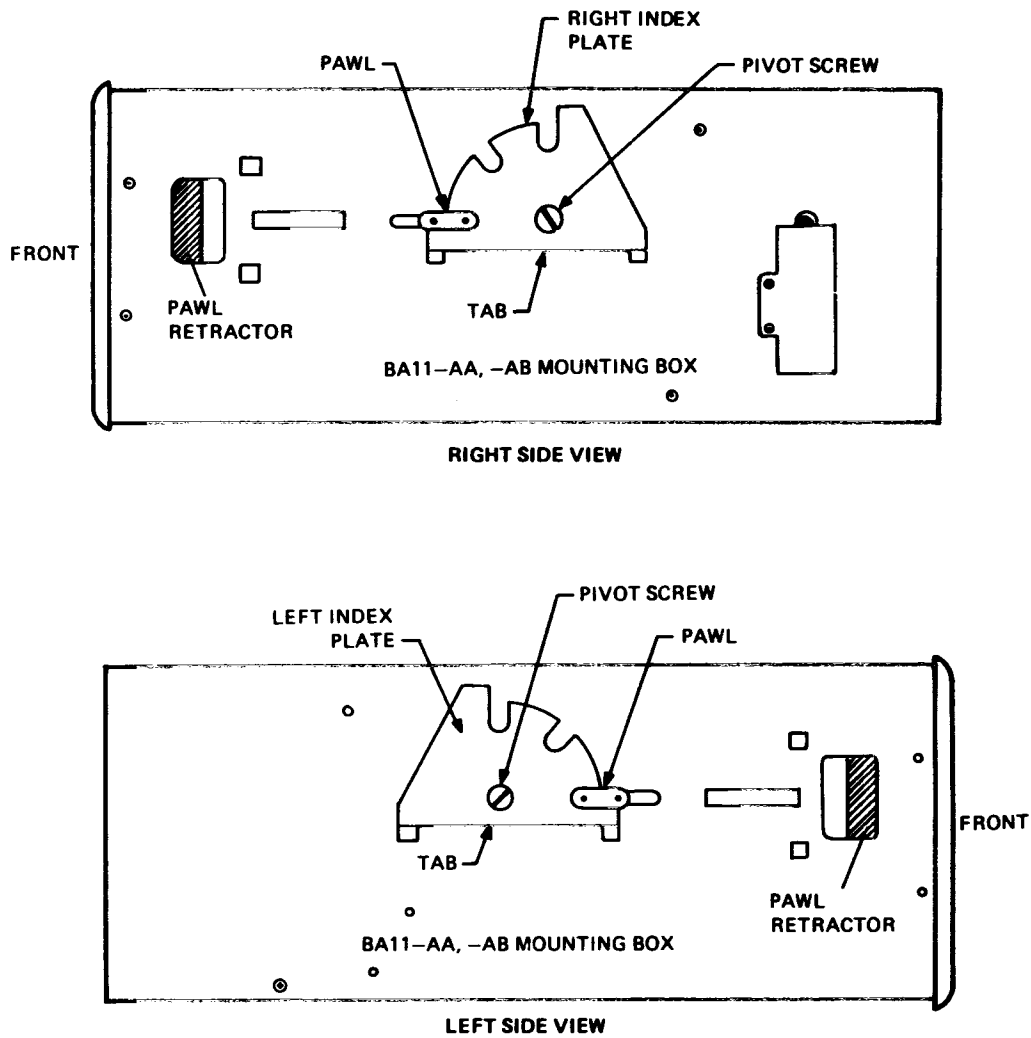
BA11-AA, -AB Mounting Box Index Plate Installation
